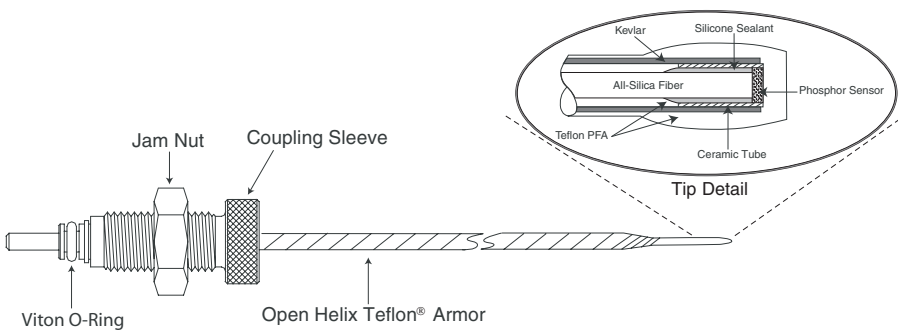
Rugged transformer probe with spiral wrap and probe tip detail
